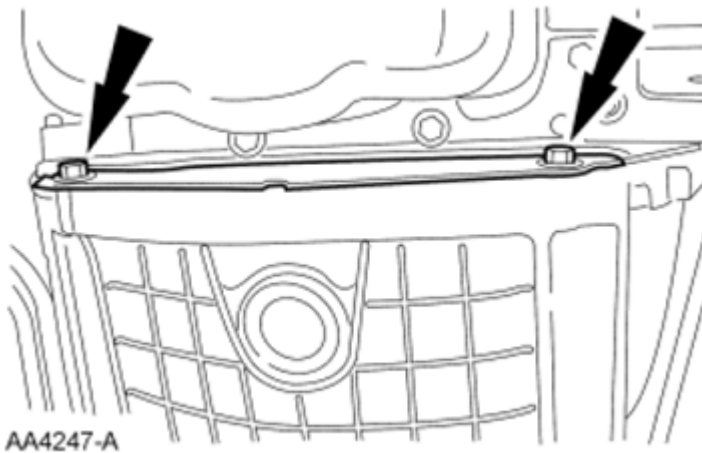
Locating Flexplate Inspection Cover And Bolts
